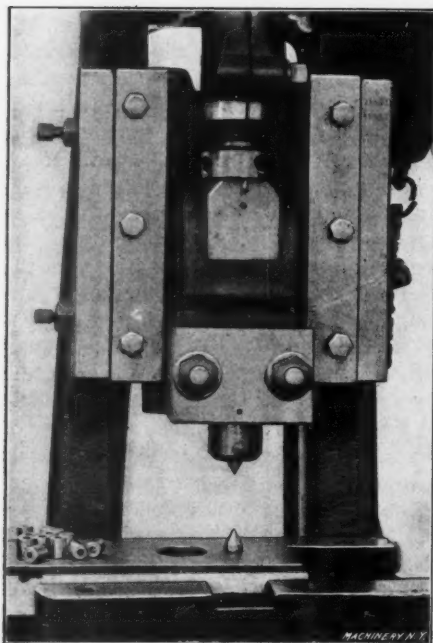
Punch Press arranged for "Countersinking" the Bearings
